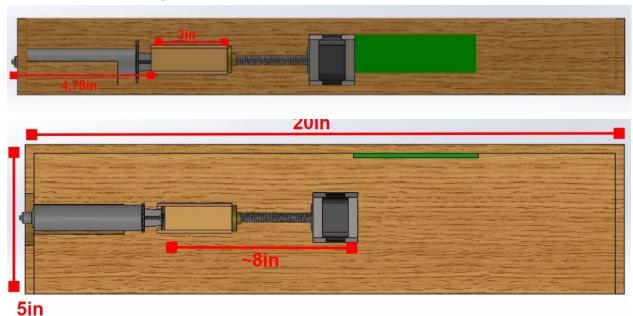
A top view of the Linear Actuator design with dimensions labeled in inches
